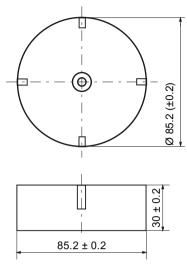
Dimension drawing of spacer 6GT2690-0AA00
